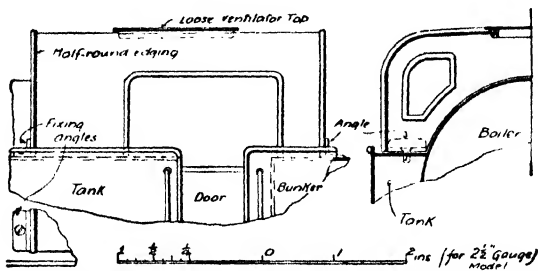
Separate Form of Tank Engine Cab, G.N.R.
